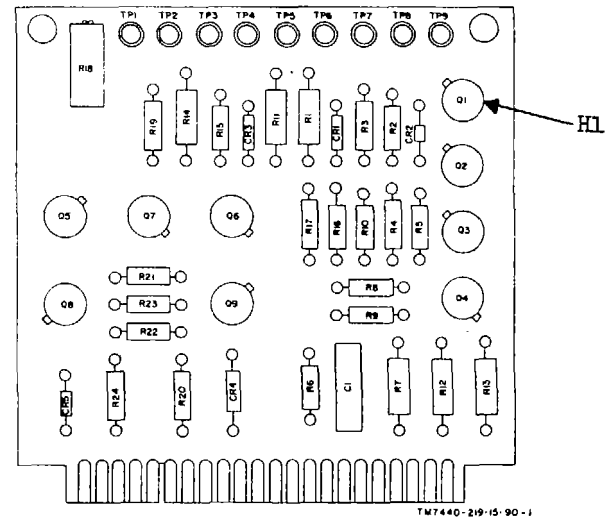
Component board assembly (-48 VDC) (PS1A3), component location diagram.
